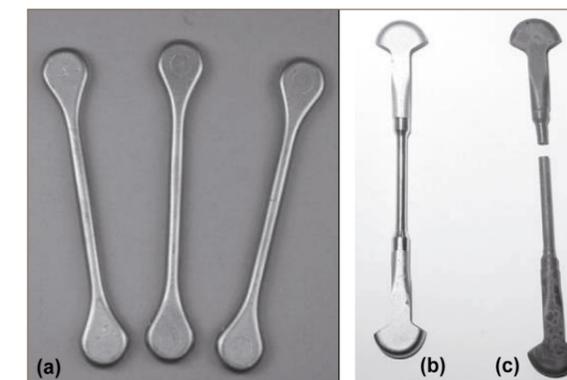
(a) MIM tensile bars, (b) MIM tensile bar, machined for HT testing, (c) MIM tensile bar after HT mechanical test (tensile test)
